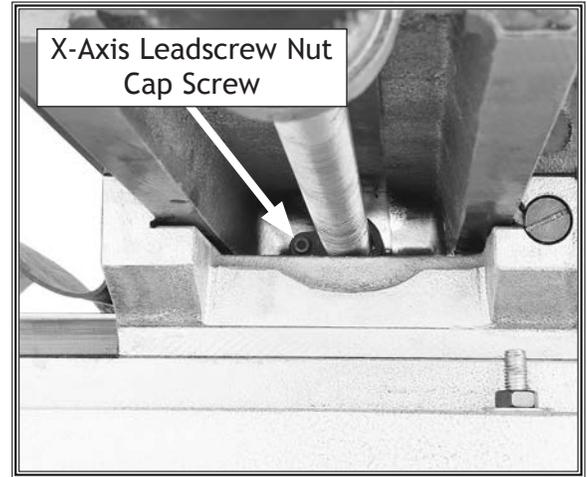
Example of X-axis leadscrew nut cap screw for adjusting backlash.
